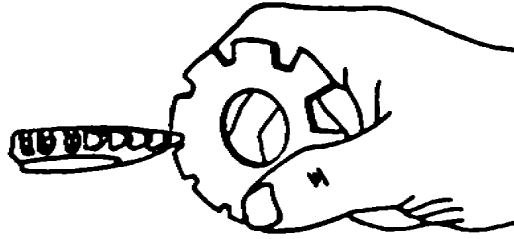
USING THREAD CUTTING TOOL GAGE
